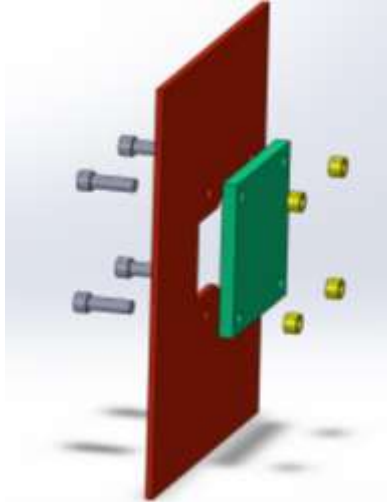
Exploded View of Target, Target Holder and Bolts
